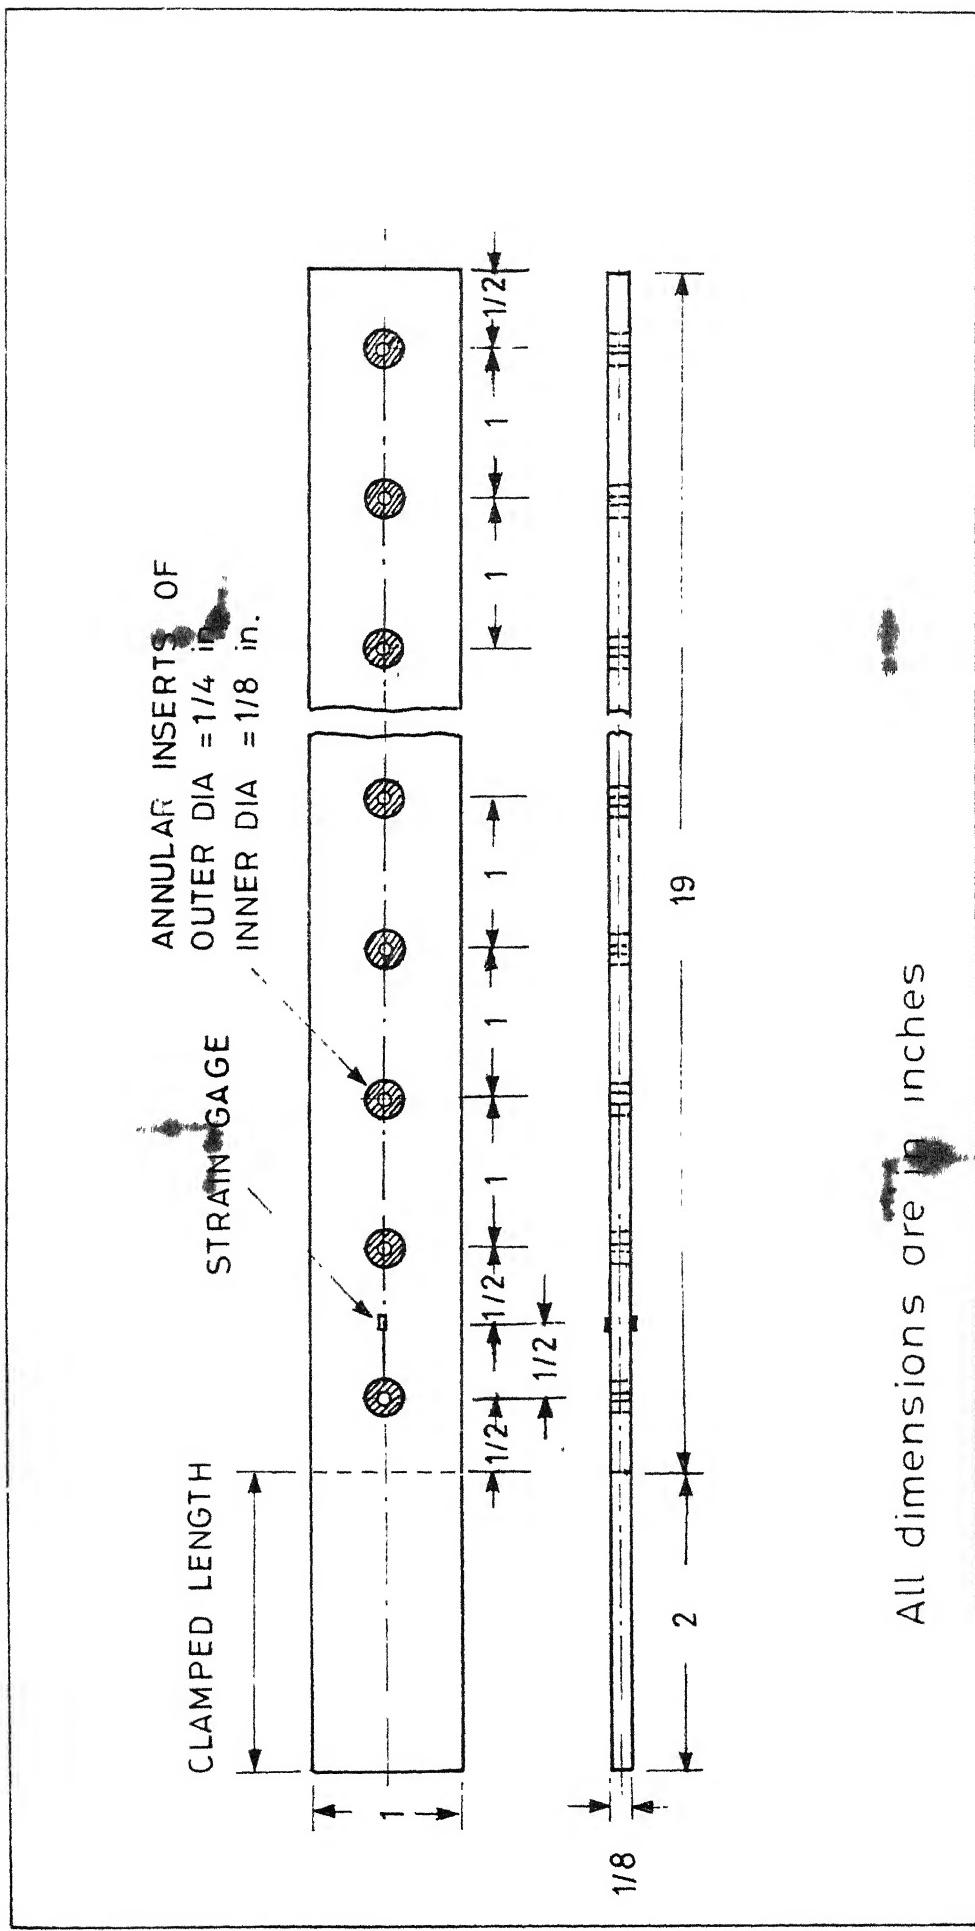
DETAILS OF ALUMINIUM SPECIMEN WITH ANNULAR INSERTS
